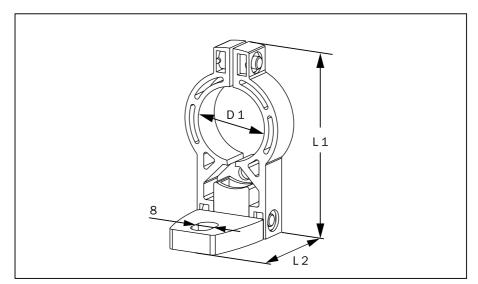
Dimensional drawing, swivel-mount bracket for C 2000, M 2000 and M 2000-A/P  $\,$
